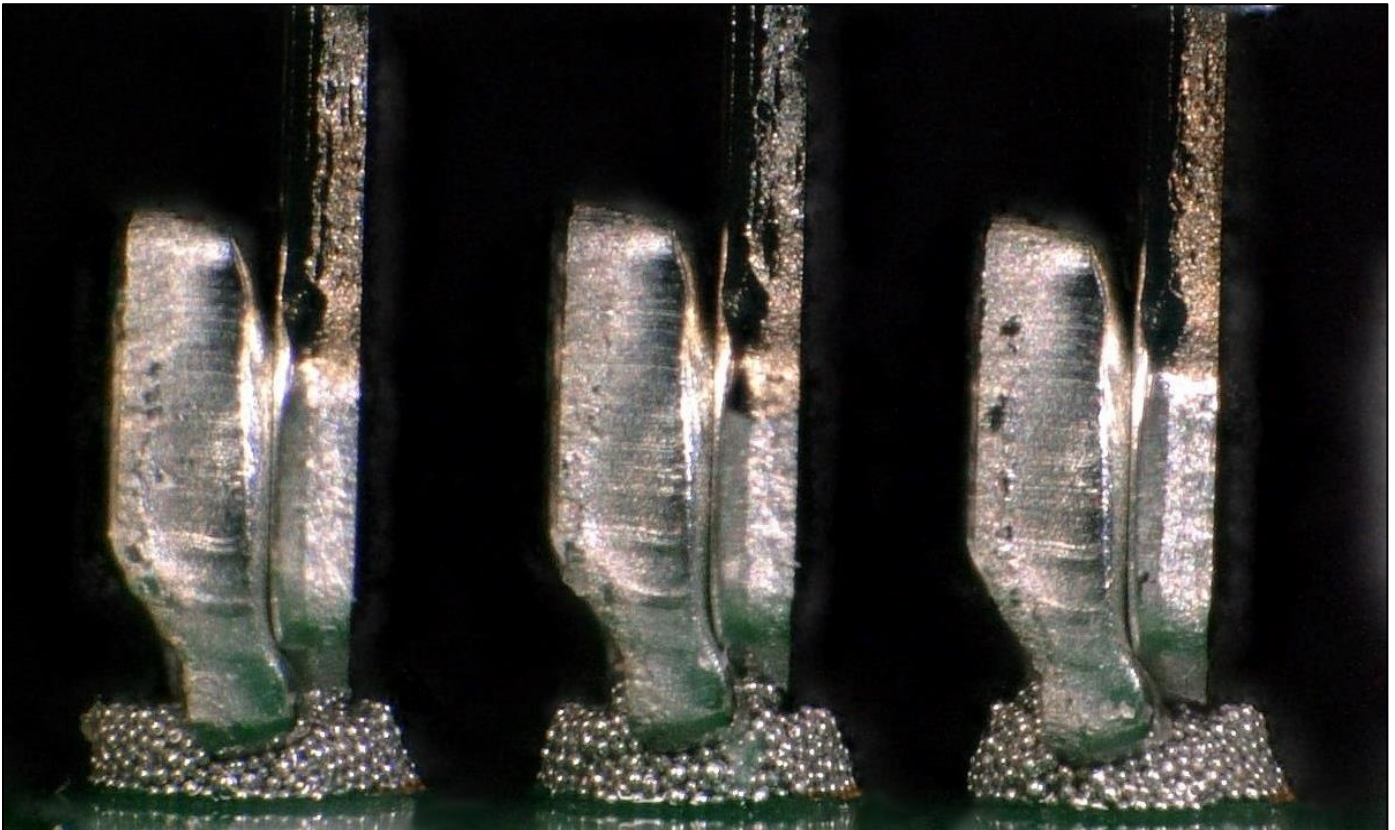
Solder charge location relative to solder paste. Notice good contact between solder charge and paste.
